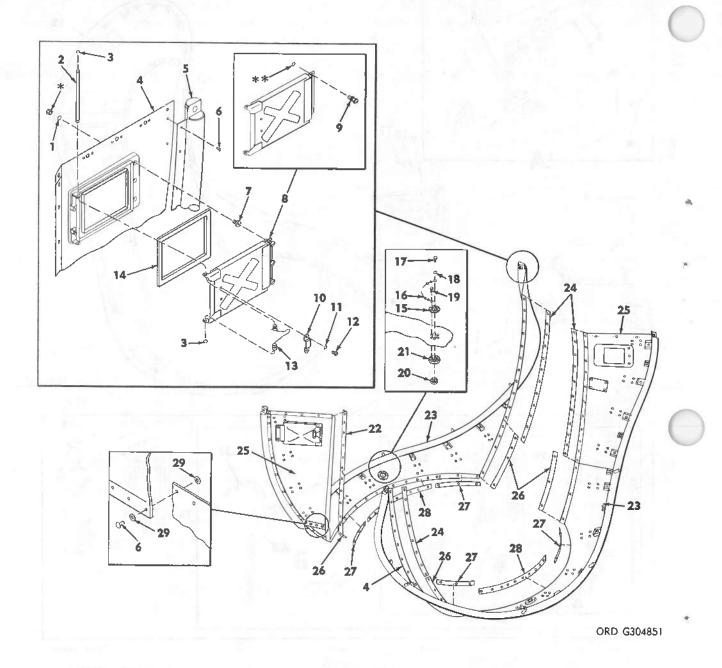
FRAME, RADOME /9005564/-PARTIAL EXPLODED VIEW
